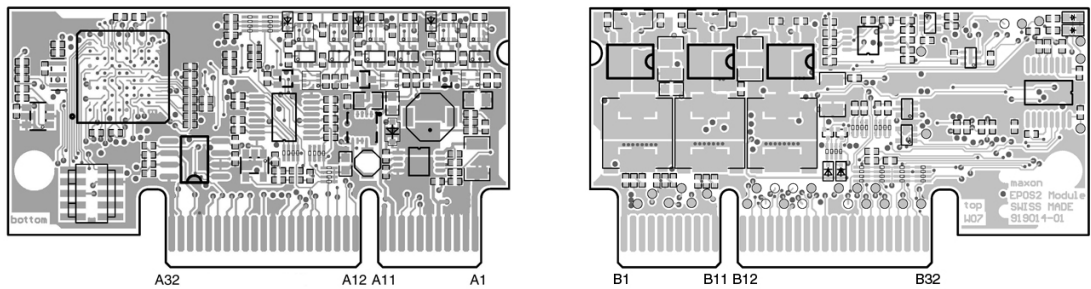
EPOS2 Module 36/2 – PCB with Connector Array
